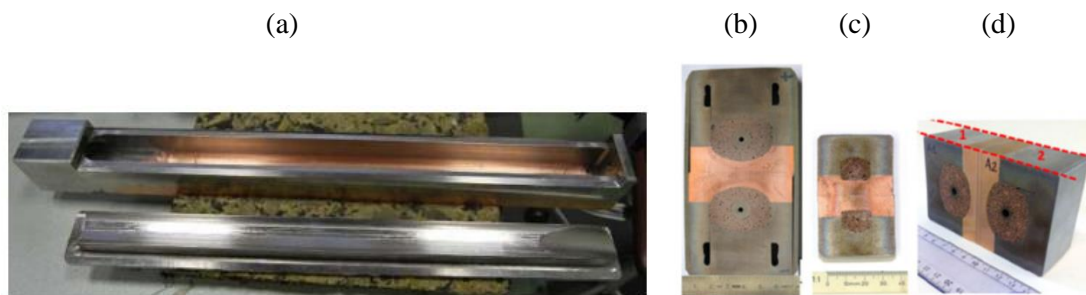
(a) Manufactured PF/MB joint; cross sections of the assembled (b) PF/MB, (c) CC and (d) TF/CS joint mock-ups [45].
